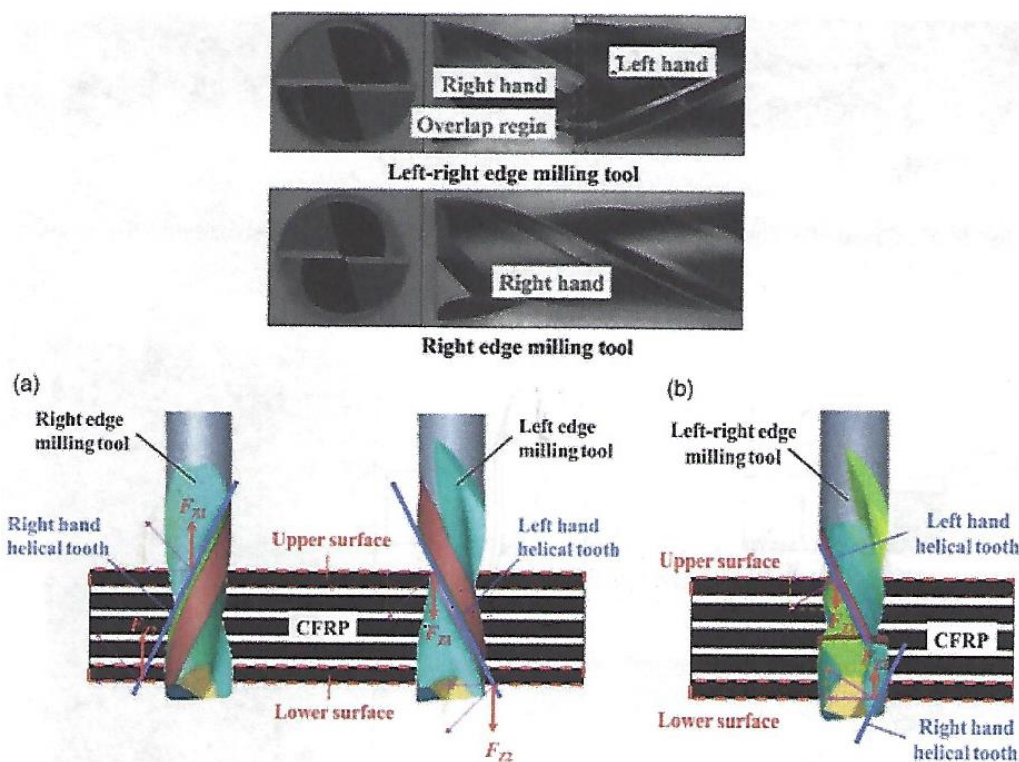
a Right hand edge and left hand edge helical helix tool, b newly proposed tool; left-right edge helical helix tool (Wang et al. 2020)
